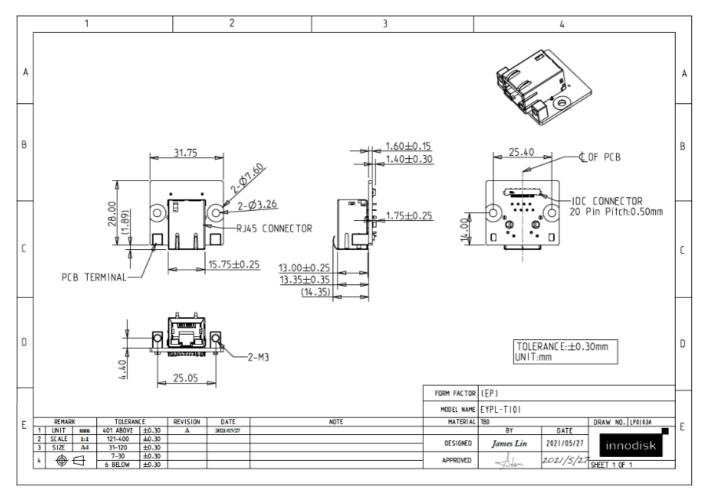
EGPL-T102 RJ45 Daughter Board Drawing
